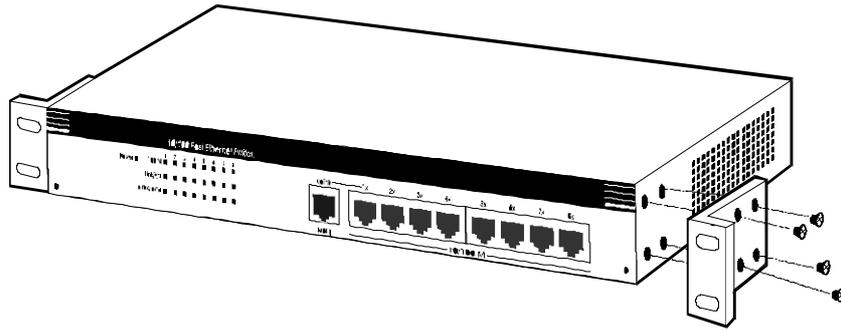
A, Attaching the mounting brackets to the 10/100 Fast Ethernet Switch
